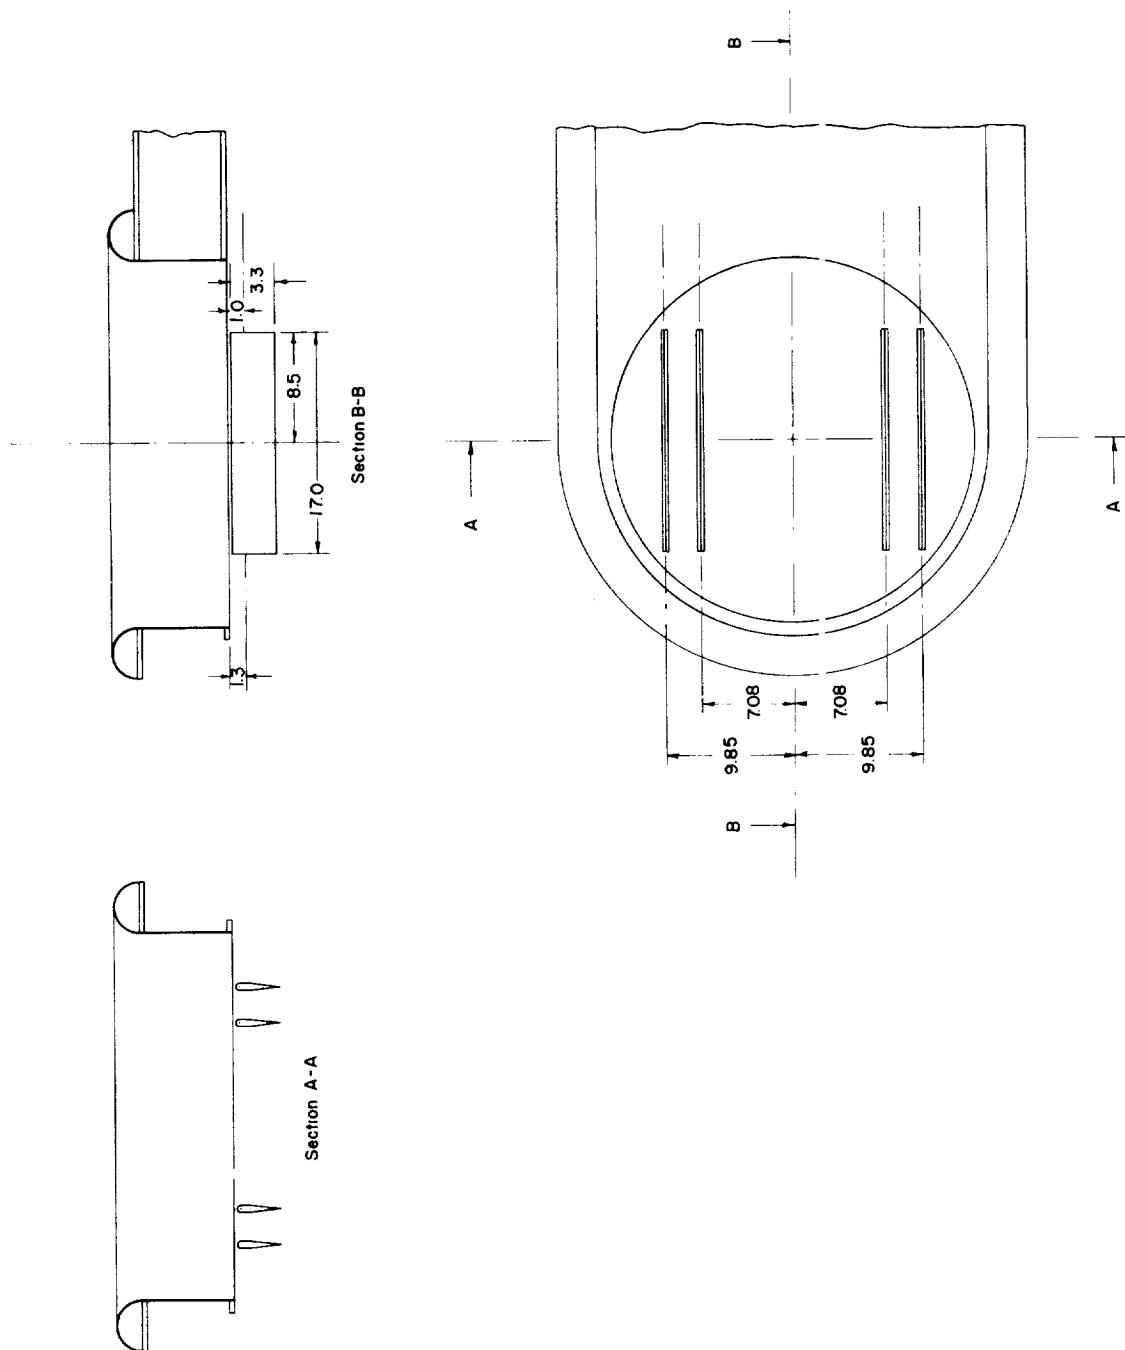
Location and dimensions of vanes used in both ducts of tandem model for roll control in hovering flight. All dimensions are in inches.
